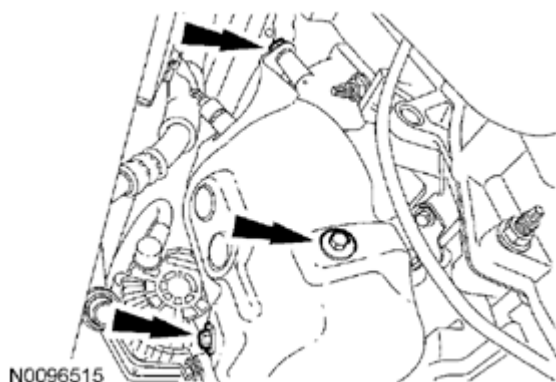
Locating Bolts And LH Catalytic Converter Heat Shield
